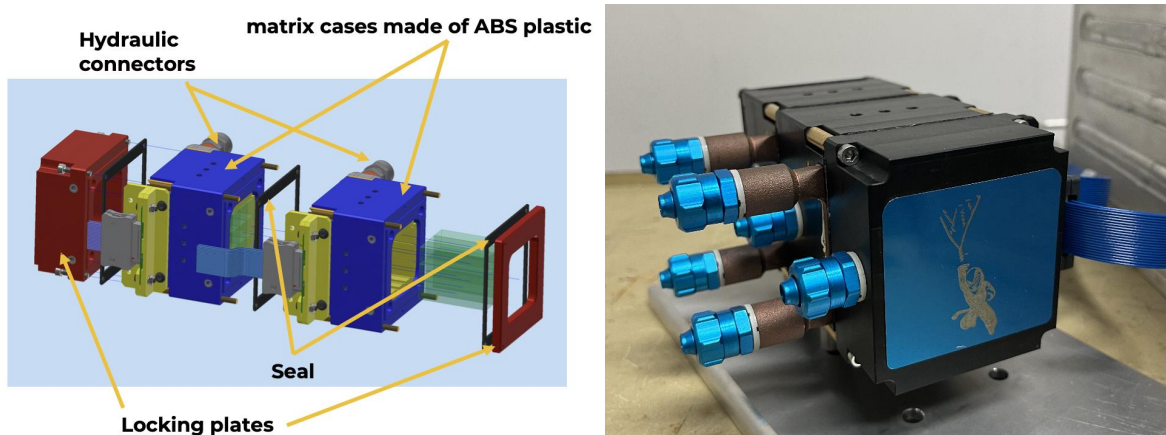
Right: rendering of the assembly of Proto-1 with the various components that form the two modules. Left: Photo of Proto-1 fully assembled. [56]
